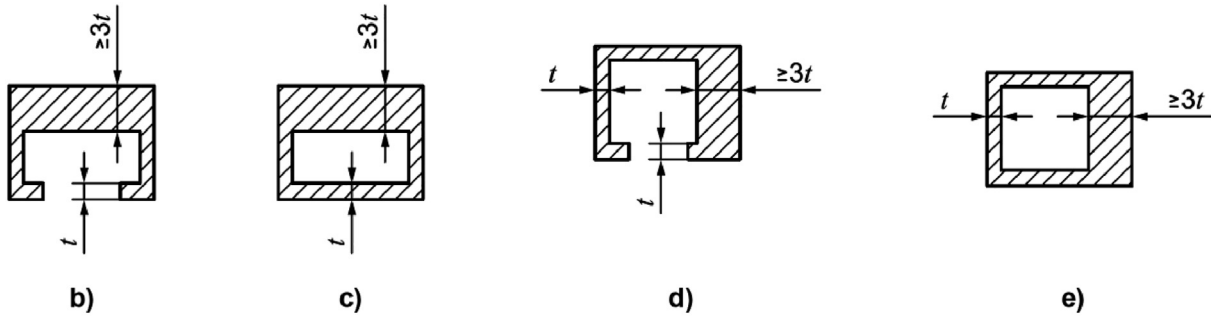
Cross-sectional dimensions of asymmetric wall thickness profiles.
